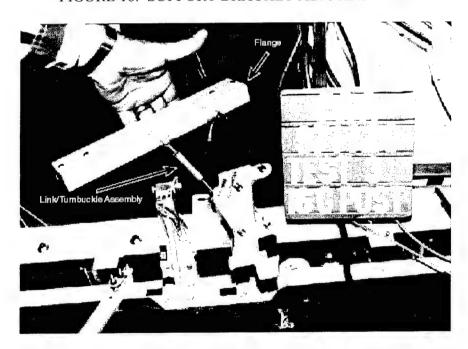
SUPPORT BRACKET AL76 SEPARATED FLANGE
